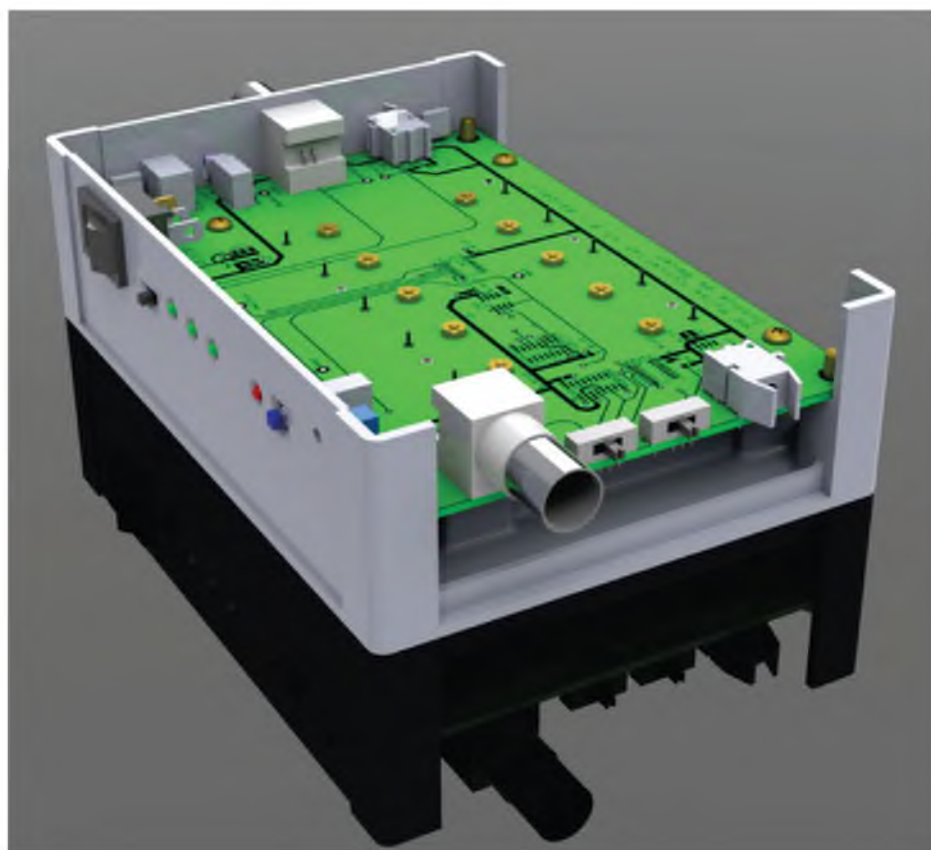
Rendering of enclosure, PCB, and mounted components.
